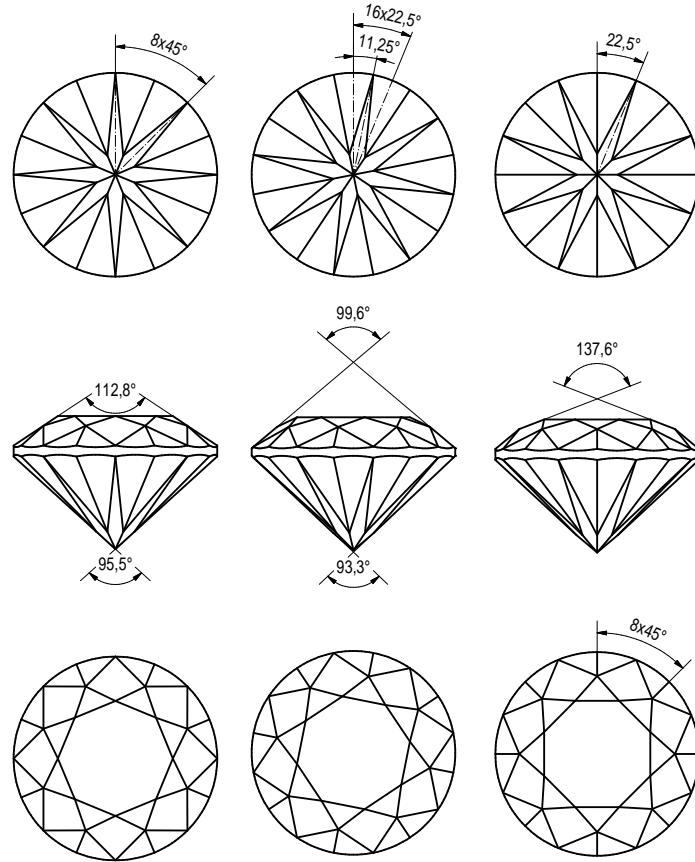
Dimensions of the brilliant cut stone. The dimensions slightly differ depending on the manufacturer, material, or product type.
